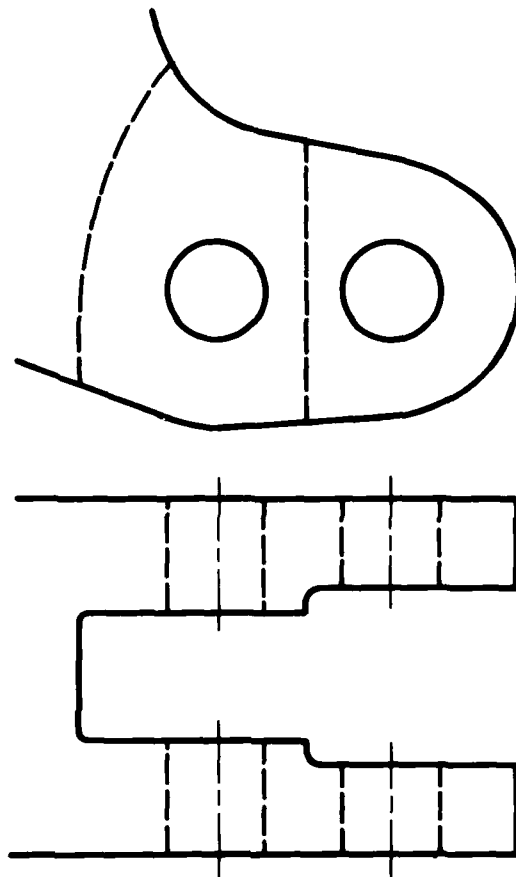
CANBERRA LOWER CENTRE SECTION FORGING LUG
